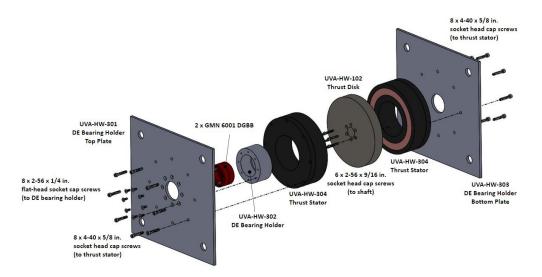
Thrust AMB / DE Backup Bearing Assembly
